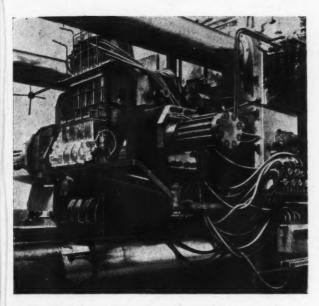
Triulzi 2,500-ton cold-chamber die casting machine with the die for the Volga cylinder block set up for operation
